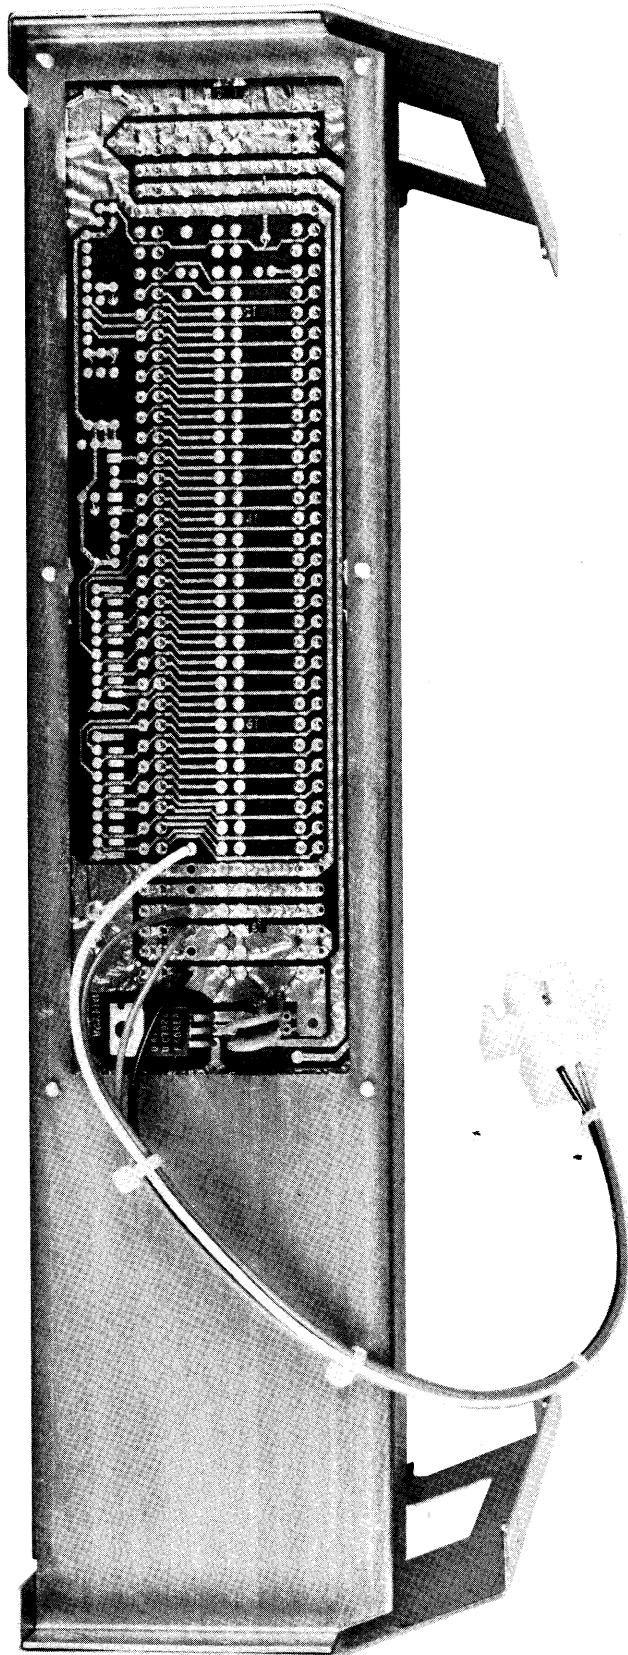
ASR - CARD CAGE ASSEMBLY/BACKPLANE
